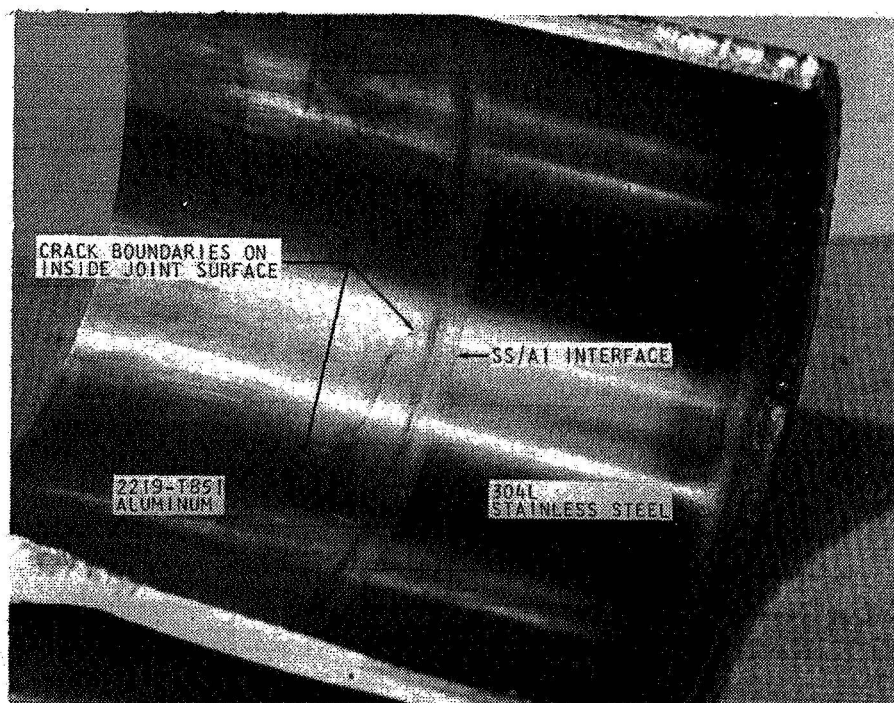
Fatigue Failure of Inertia Welded Joint
